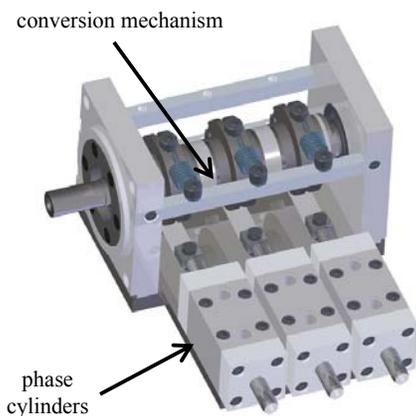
Alternating flow driven hydraulic motor with pulley and elastic steel sheet conversion mechanism.
